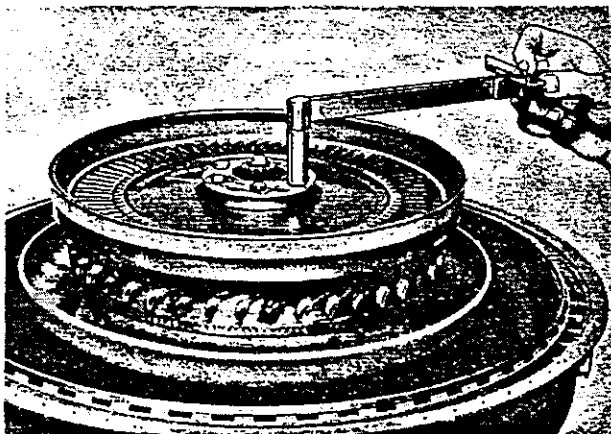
Tightening First Stage Turbine Wheel Plate Bolts
